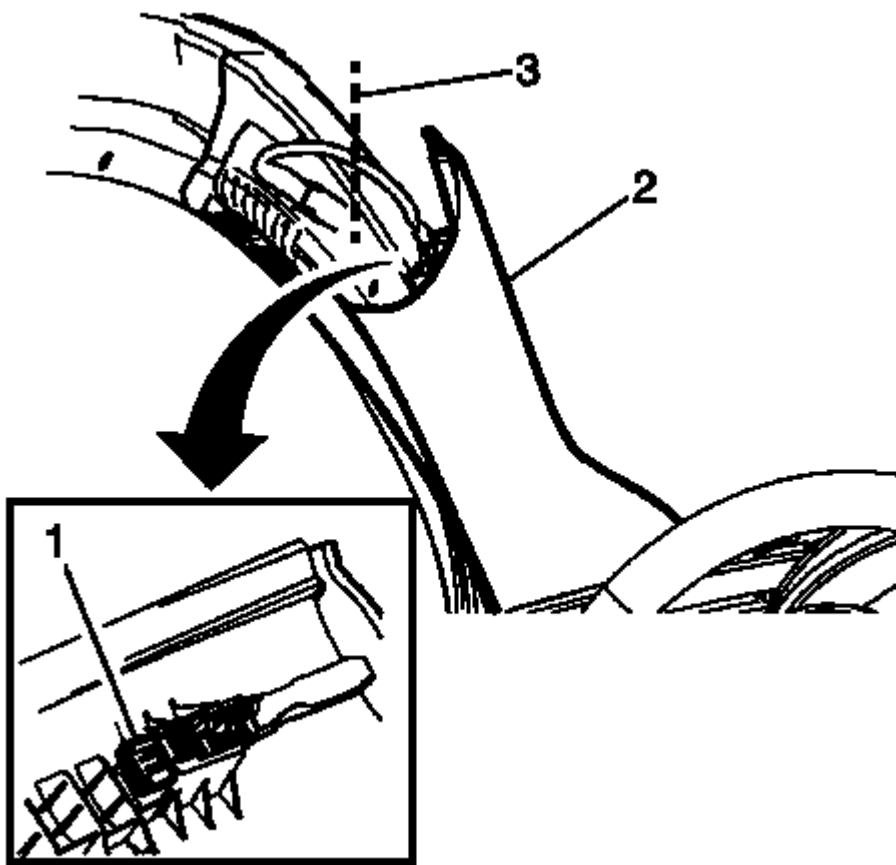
Pulling Upper Side Of The Windshield Side Garnish Molding
